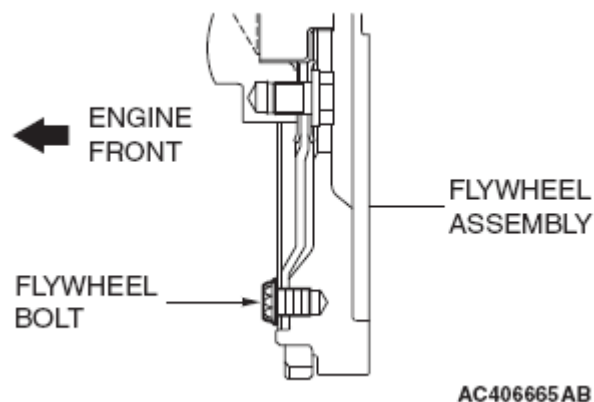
Identifying Flywheel Bolt And Flywheel Assembly
